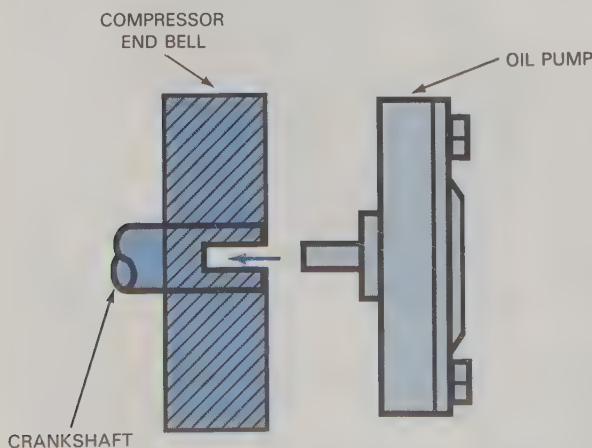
The oil pump is bolted to the end bell of the compressor and driven by the crankshaft.
